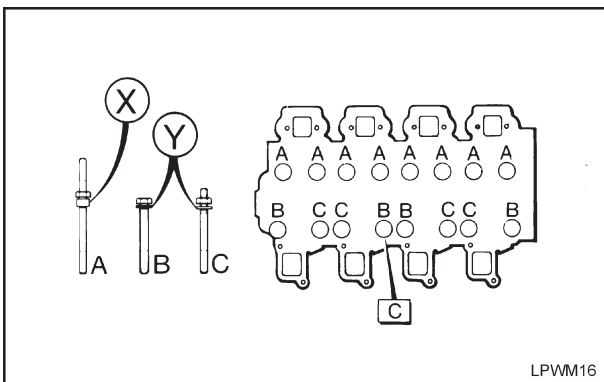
Head Bolt Locations - LPW(S)T4
